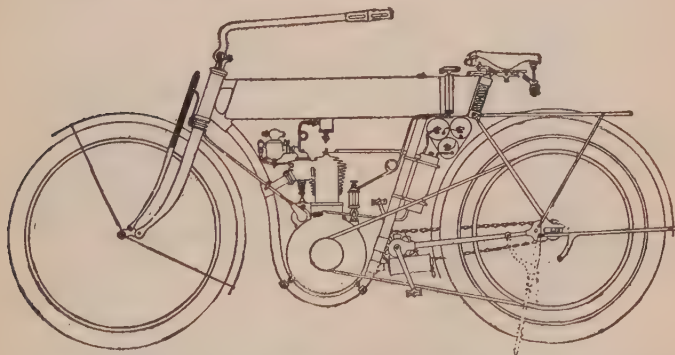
A belt drive motor cycle. As shown, the tension of the belt is adjusted by changing the position of the rear wheel axle. Another method of regulating the belt tension is by means of an adjustable idler pulley, illustrated in figs. 281 and 282. The above cut shows the general arrangement of the various parts, such as, carburetter, gasoline tank, ignition system, etc.
